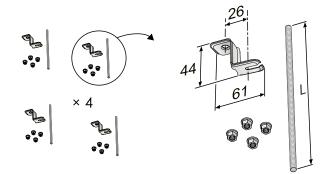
Assembly fitting SYST MS M8-1, ceiling mount and threaded rod
